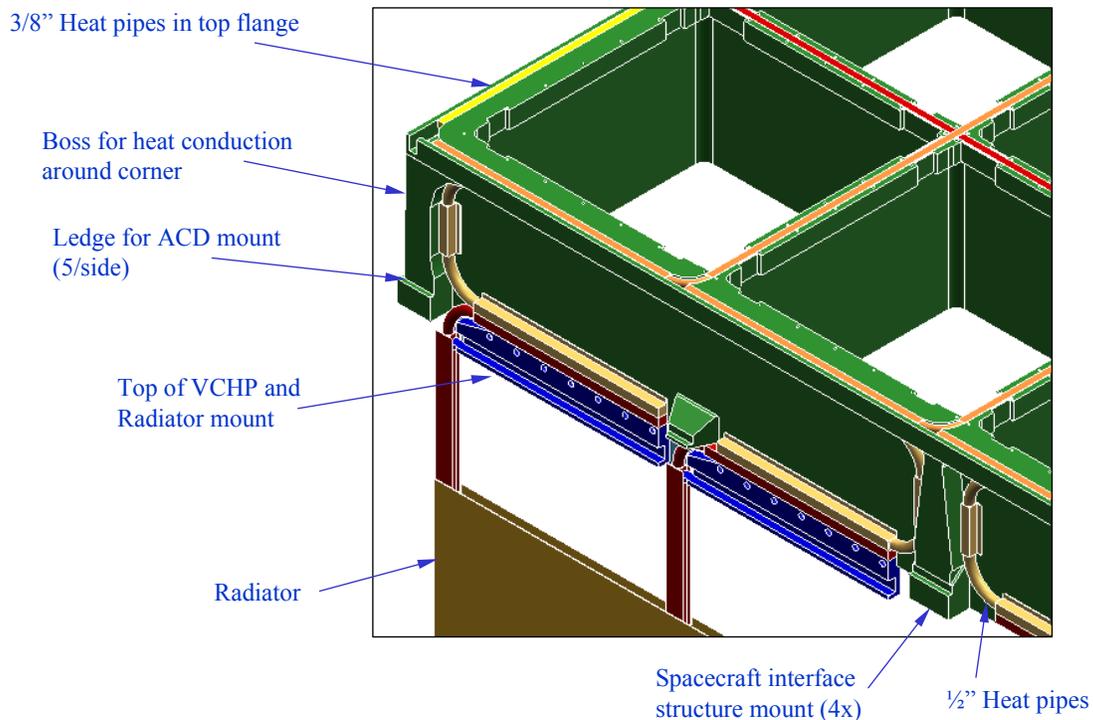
Grid corner detail, showing radiator and heat pipes
